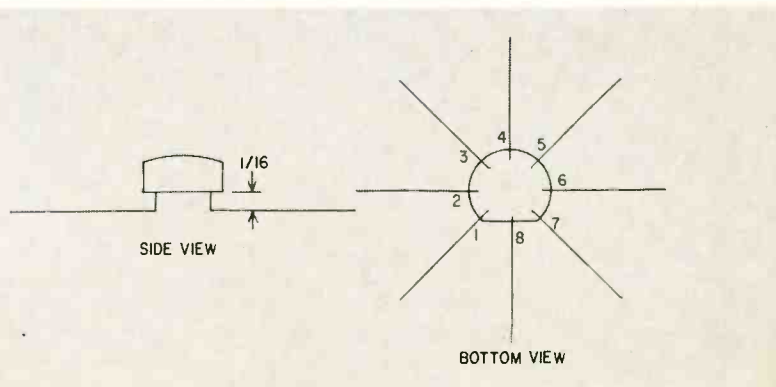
Basing of the μ L914. Be sure to bend the leads carefully as shown, and don't put any strain on the case. Heat sink and avoid overheating when soldering the leads.
